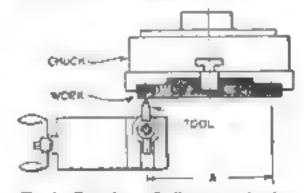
Running a fly line on a circular piece of work in the lathe with a fine pointed tool
